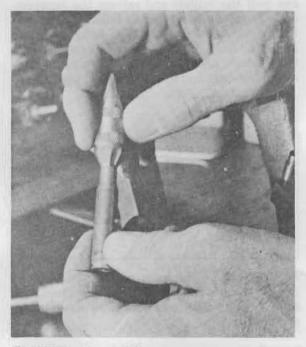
After trimming and before full-length sizing, the case mouth should be chamfered and beveled with a burring tool.
